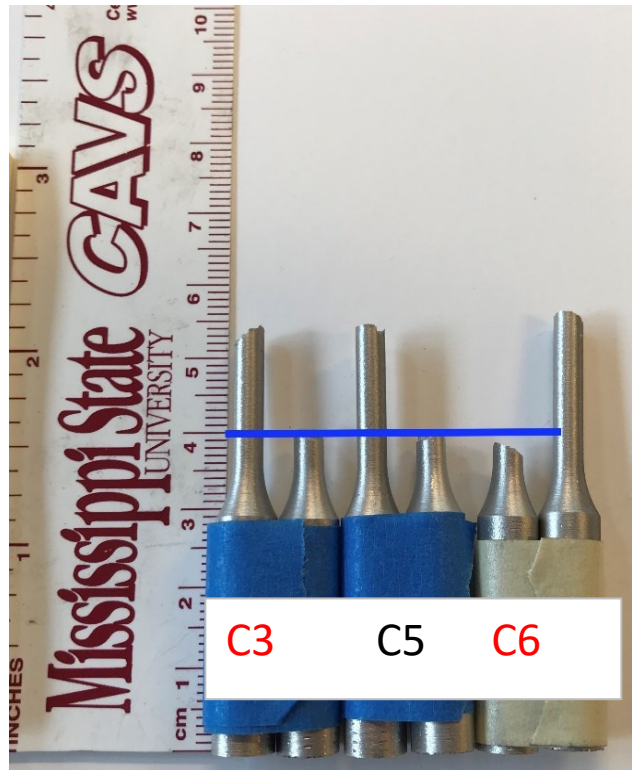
Macroscopic fracture image of 24 hour air cylinders.
